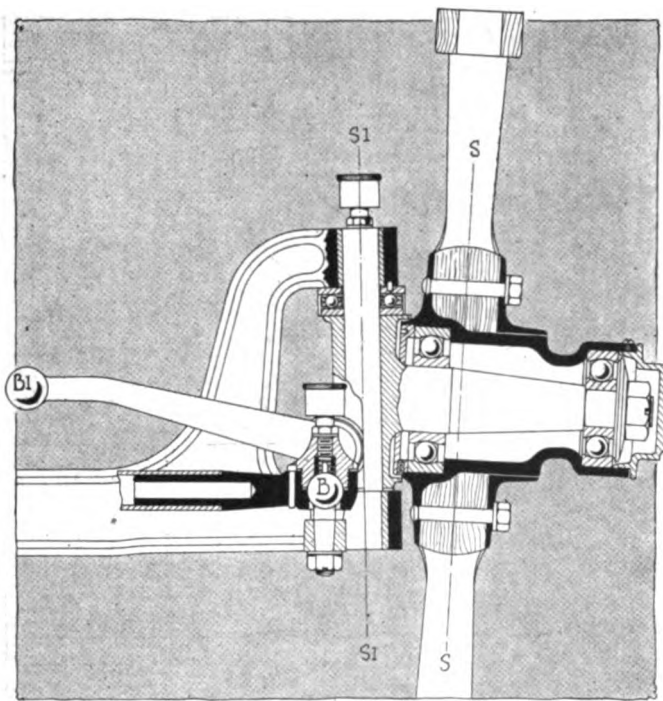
Ball bearing steering knuckle and spindle. Note wheel slope which is measured by the converging lines through the center of the steering knuckle and of the road wheel designed to give minimum tire wear and easy steering
